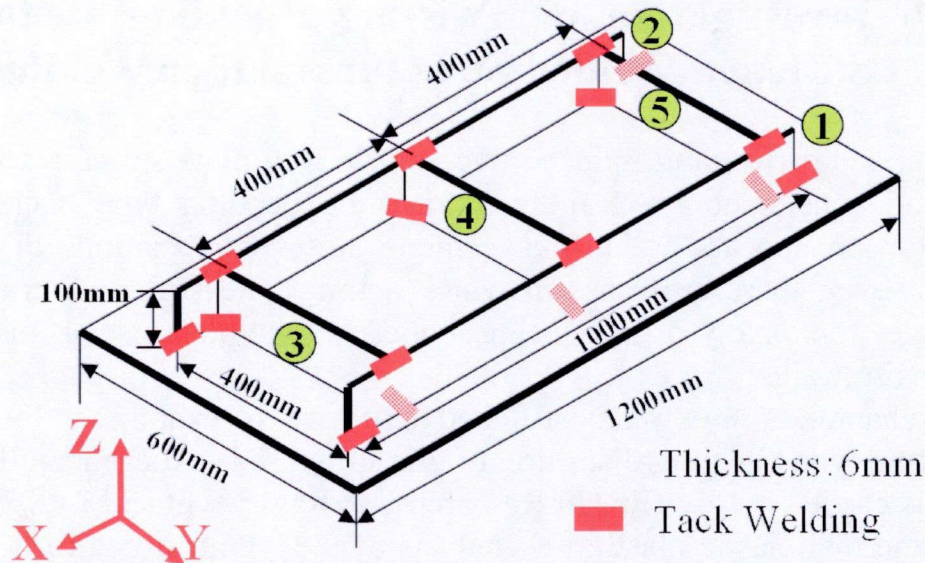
Dimension and welding sequence of the considered thin plate stiffened structure.
